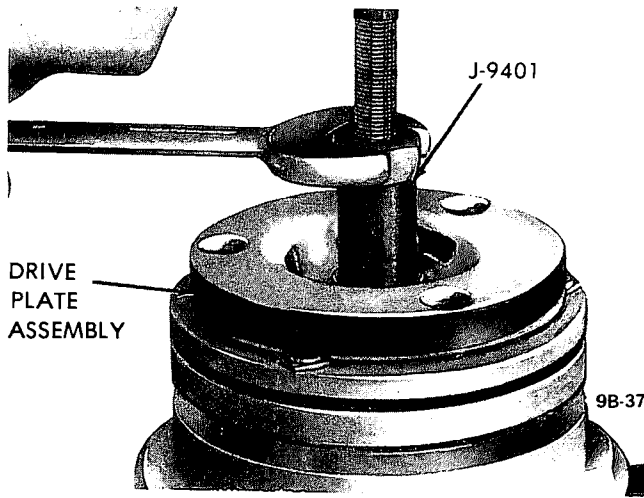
B-60 Removing Clutch Drive Plate - 6 Cylinder Compressor
